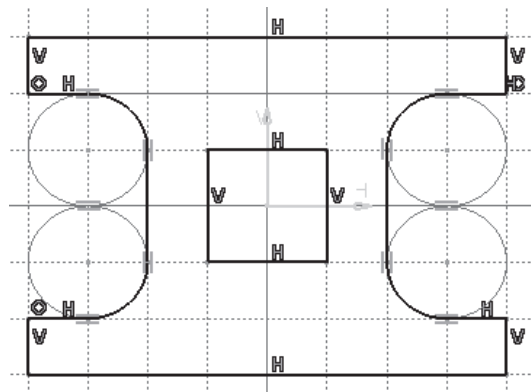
The final sketch after drawing the inner loop of the sketch
